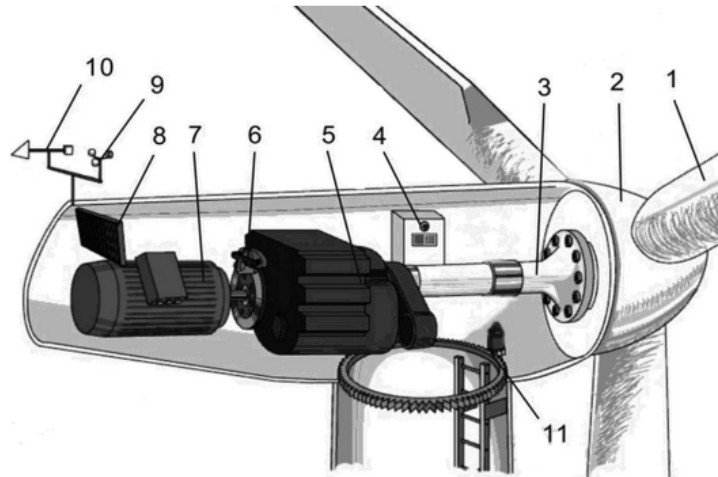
Nacelle internal parts: 1, impeller; 2, hub; 3, main shaft; 4, controller; 5, gearbox; 6, mechanical brake; 7, generator; 8, cooling system; 9, anemoscope; 10, wind vane; 11, yawing motor and yawing bearing [3]
